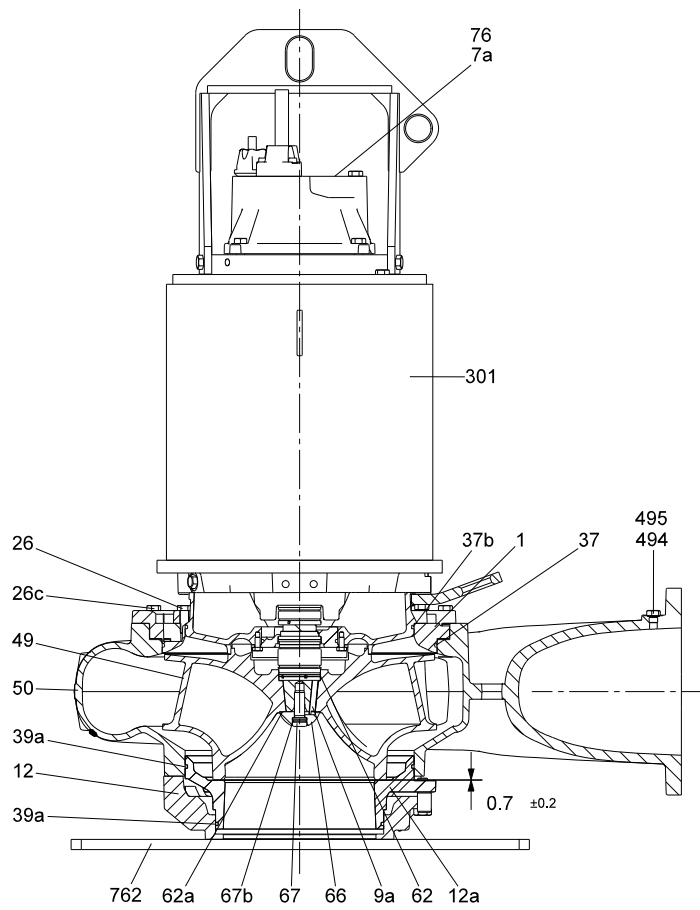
Installation type D, dry, vertical pump on base plate - version 1
